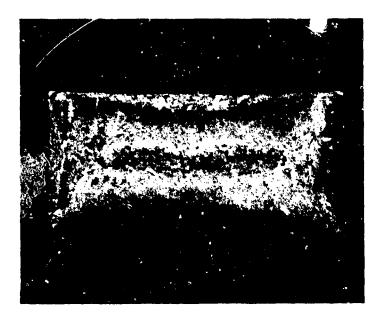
Fracture surface of a 17-4PH hydrogen-charged tensile specimen, 10x.
